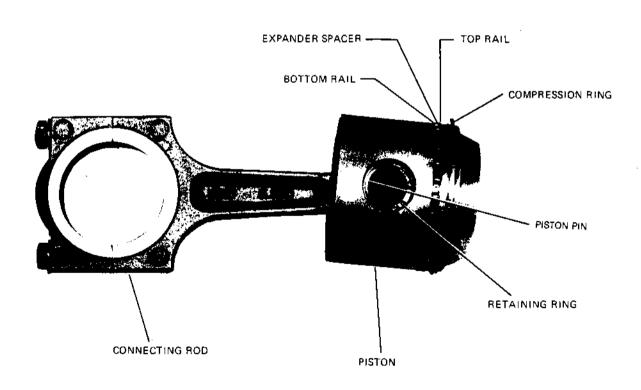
PISTON/CONNECTING ROD ASSEMBLY
